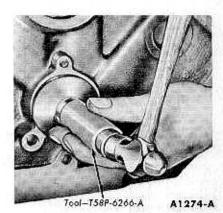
Camshaft Rear Bearing Bore Plug Installation
